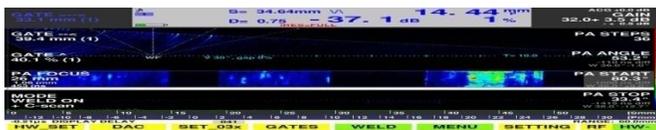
Ultrasonic phase array Defectogram of welded HE15 material Defect at 0.75mm depth
